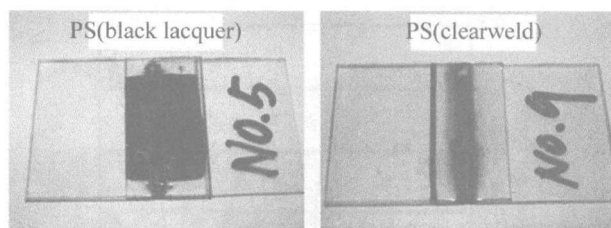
Appearance of PS coated with black lacquer and clearweld additive after welding
